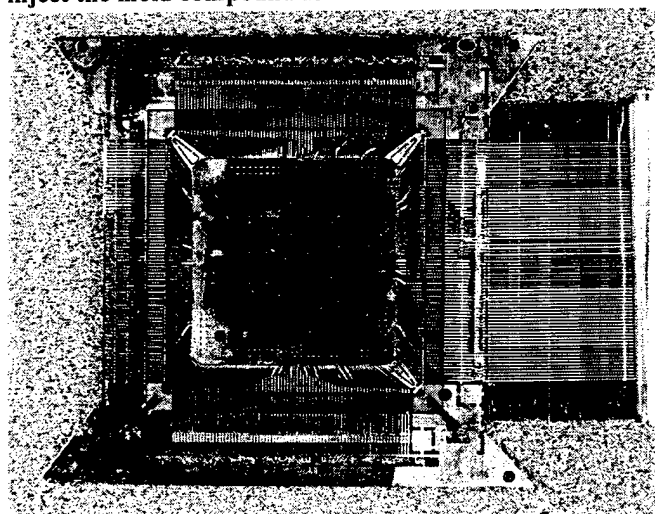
Lead frame showing the assembly cut to a single frame and solder attached to the flex cable. A Kapton frame insulating the leads can be seen around the part coinciding with the position of the mold edges that clamp against the part to seal the mold.
